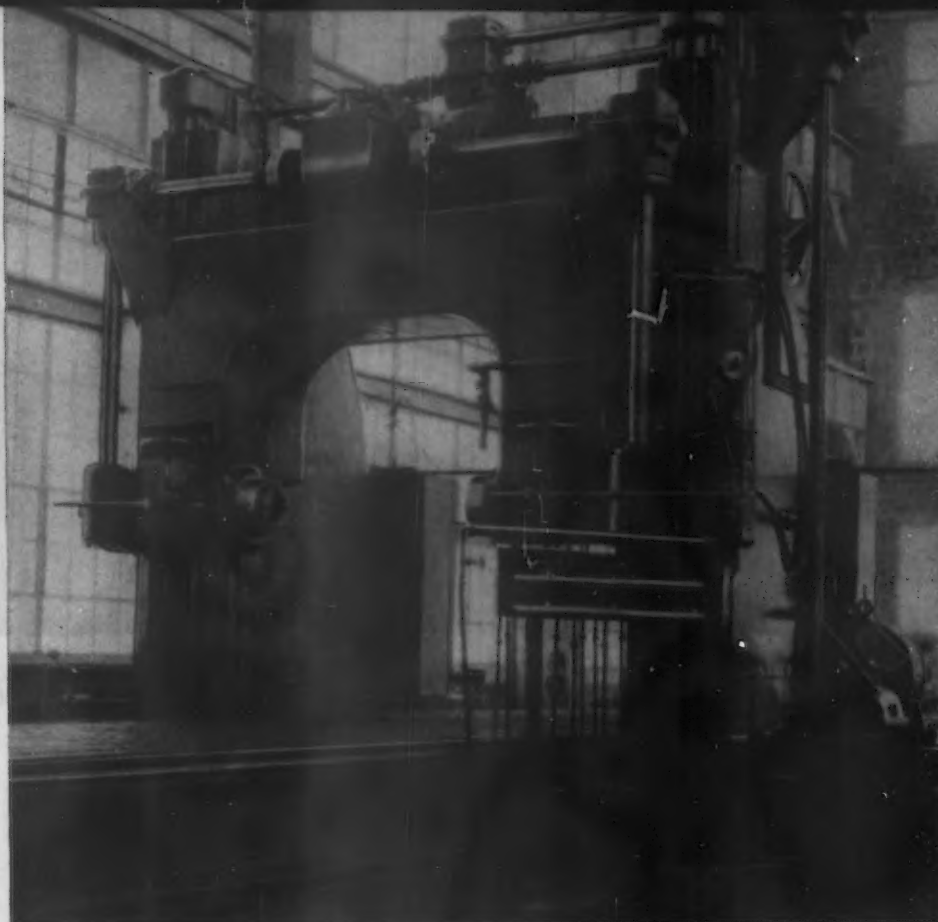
Milling machine (Newton) with two horizontal spindles, used entirely for straddle milling operations.
